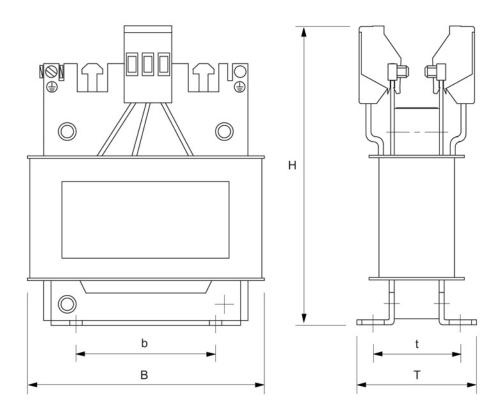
Dimension drawing of line reactor for Smart Line Modules (5 kW and 10 kW)
